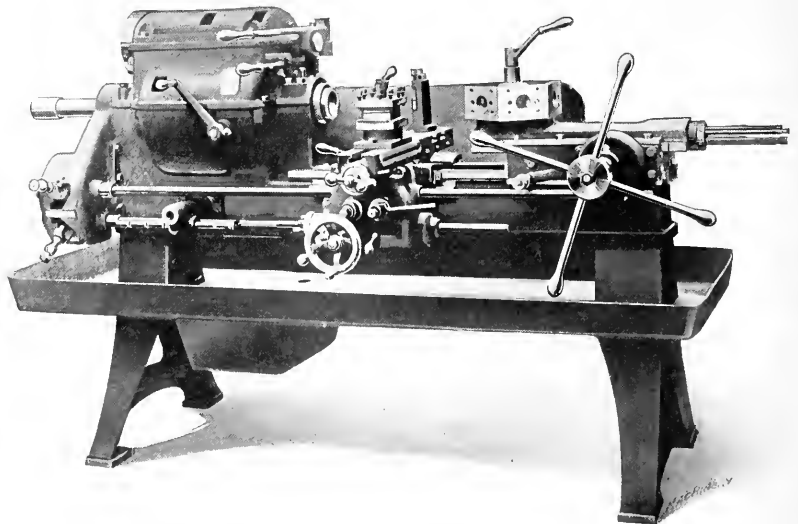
Warner & Swasey No. 4 Universal Turret Screw Machine with Single Pulley and Geared Head
